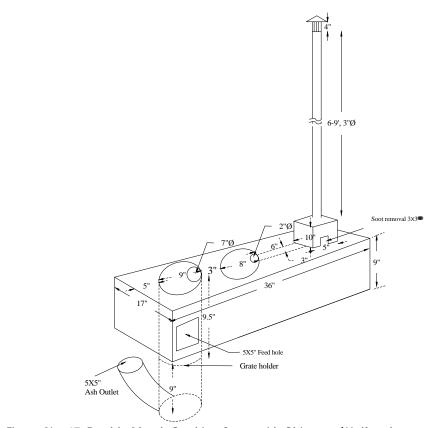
Double Mouth Cooking Stove with Chimney (*Half underground*) showing different dimensions of the stove
